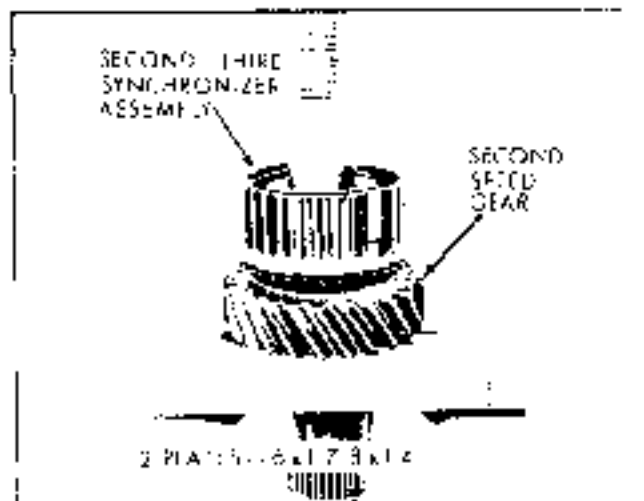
B-18 Removing Second + Third Synchronizer and Gear
